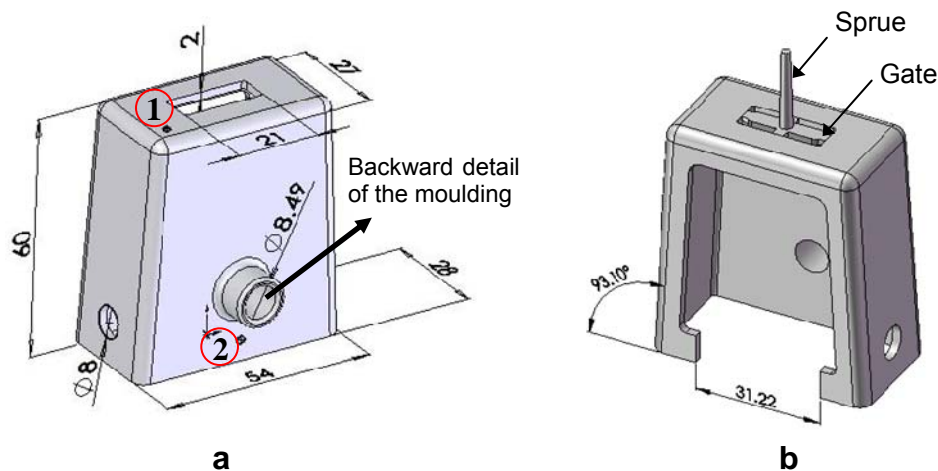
Support box: a) main dimensions, b) part with the runner system
